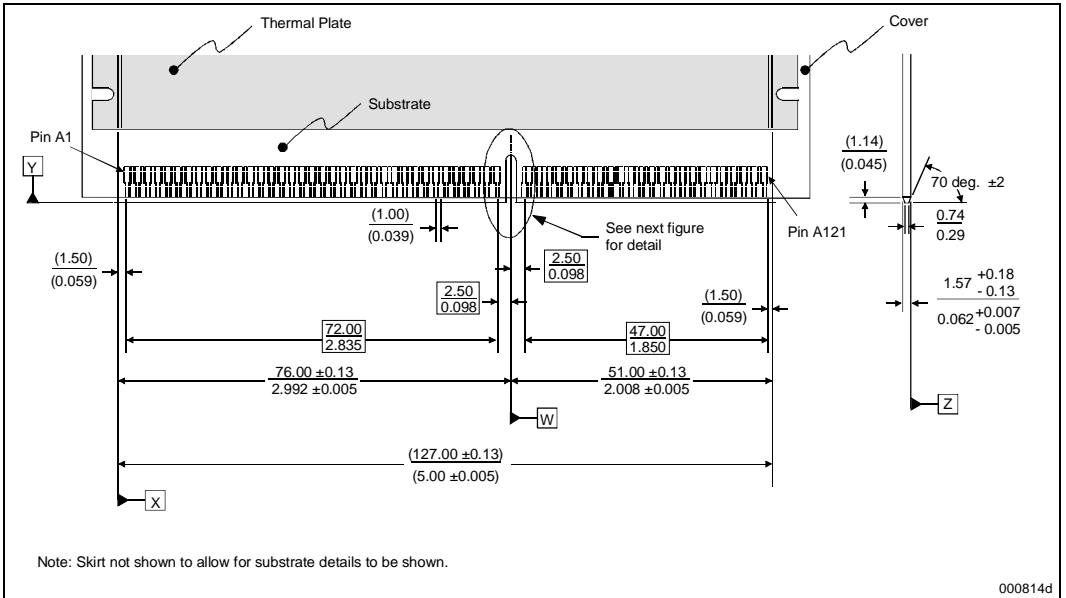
Substrate – Edge Finger Contact Dimensions, Thermal Plate Side View
